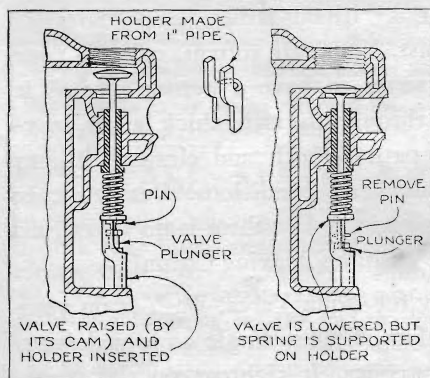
A piece of iron pipe cut out on two sides is handy tool to hold up valve spring.
